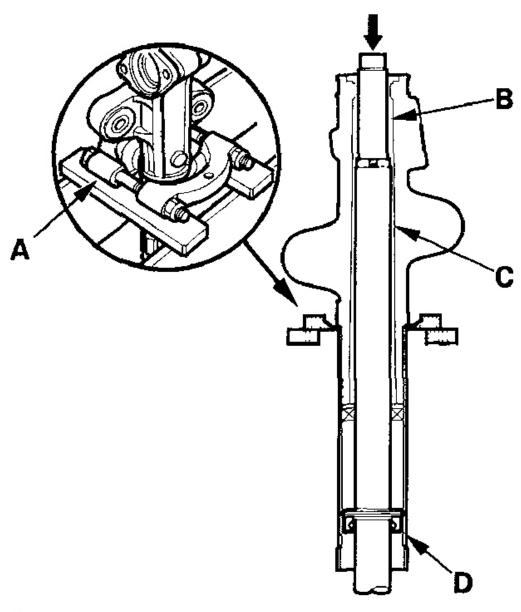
Clamping Yoke In Vise Using Soft Jaws Courtesy of AMERICAN HONDA MOTOR CO., INC.
